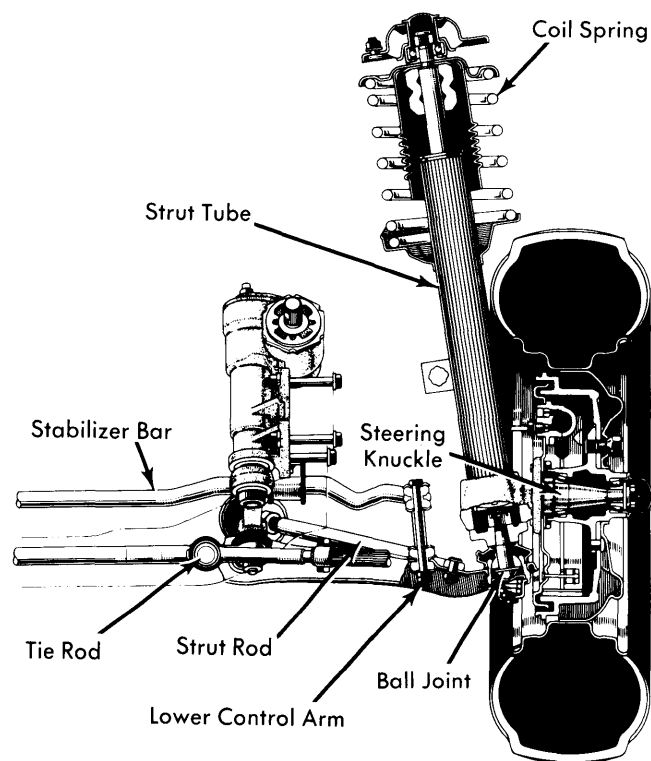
Typical Front Suspension Assembly for Celica and Corolla
